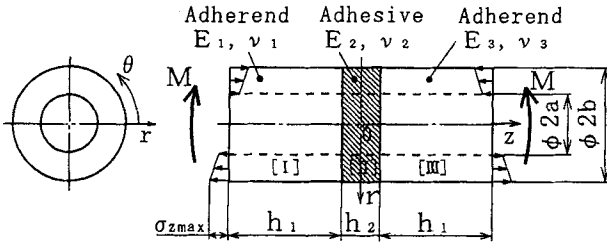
Adhesive butt joint of dissimilar hollow shaft subjected to external bending moment.
